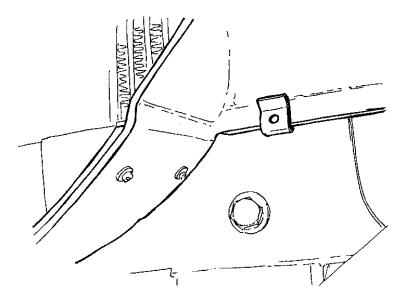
Verify Modified Fan Shroud Engages "S" Clip
